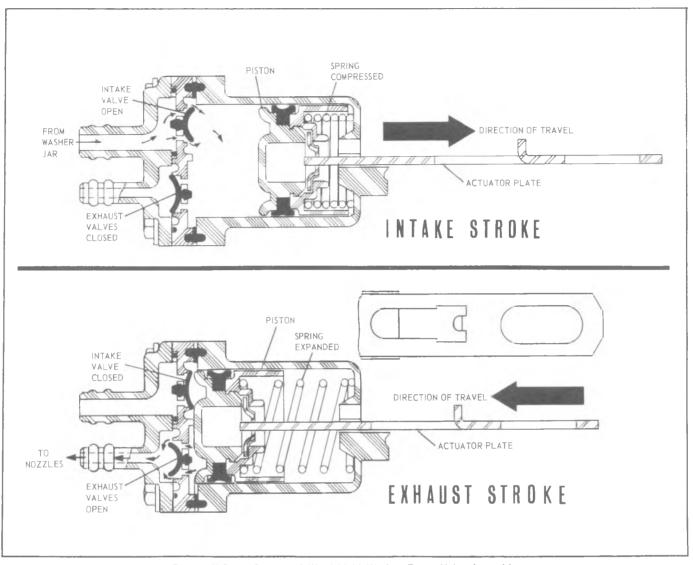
Cross Section of Windshield Washer Pump Valve Assembly
